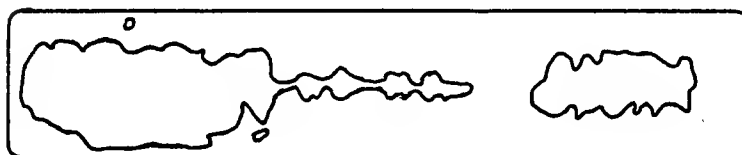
Sketch of failure surfaces after opening experimentally aged samples.
